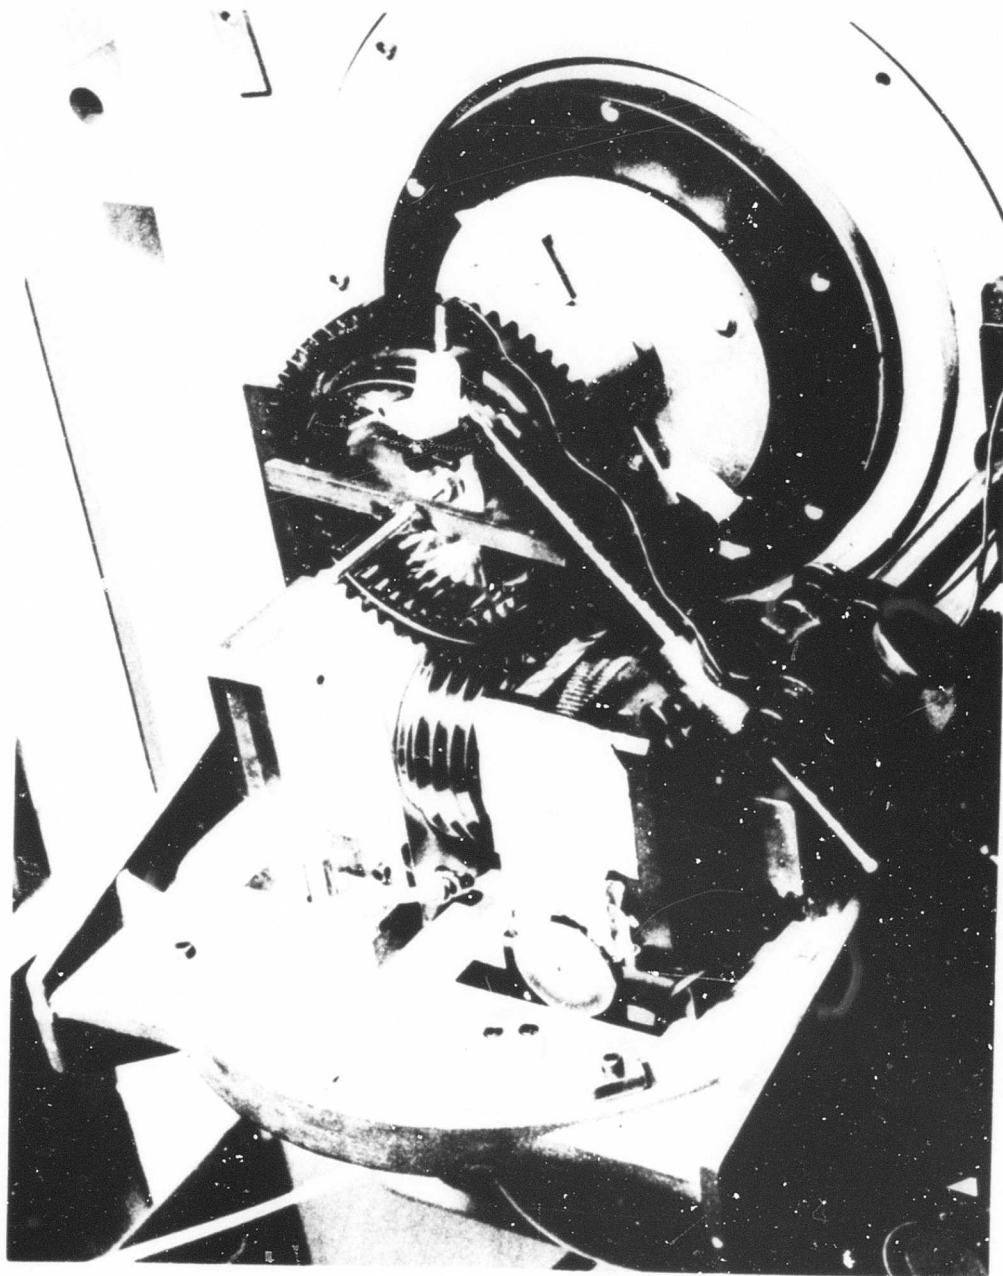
Measurement of the Lower Stage Planetary Sun Gear on the Gear Cardiograph.
